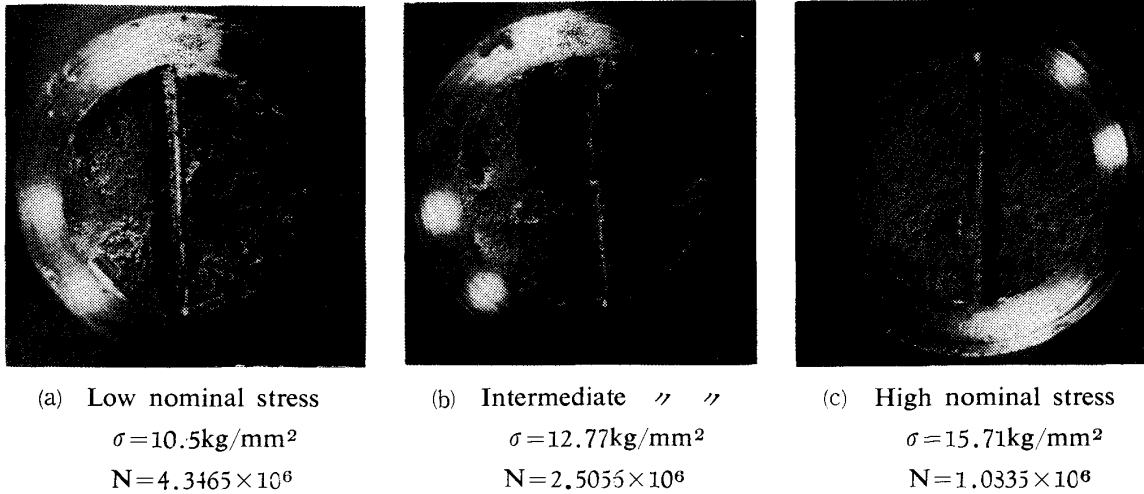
Fatigue fractures of semi-circular notched specimens with a 1.0mm hole.
